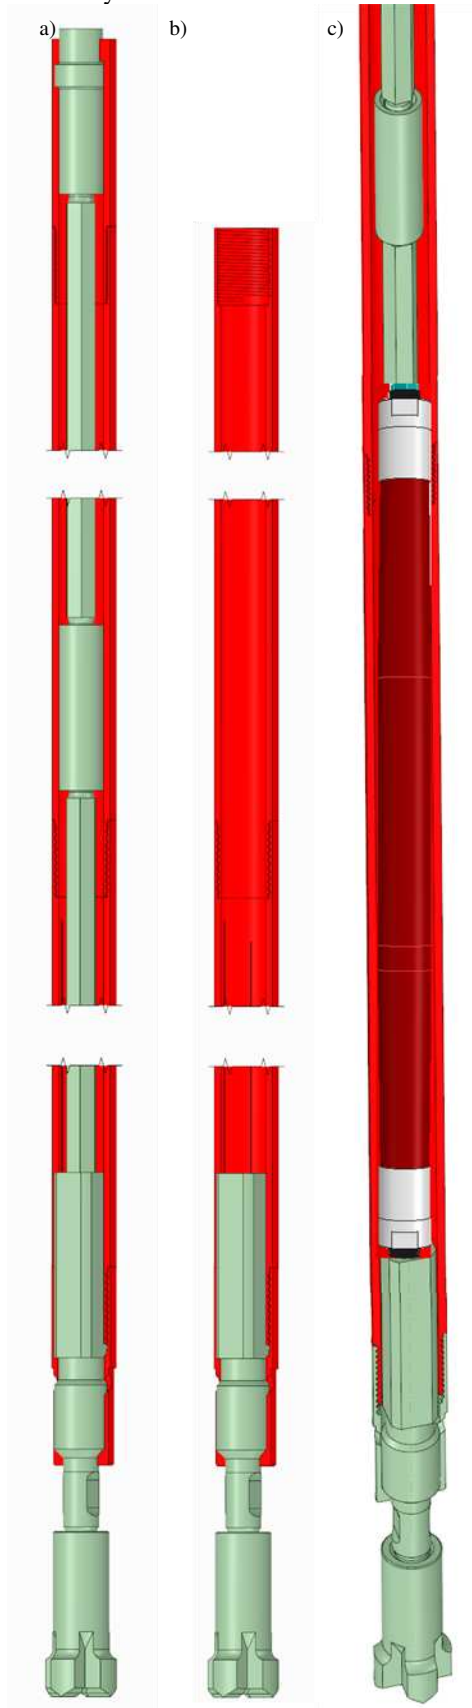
shows the slotted tube and the drilling tool. The hexagonal drill rod passes through the slotted tube and is connected to the drilling tool.
